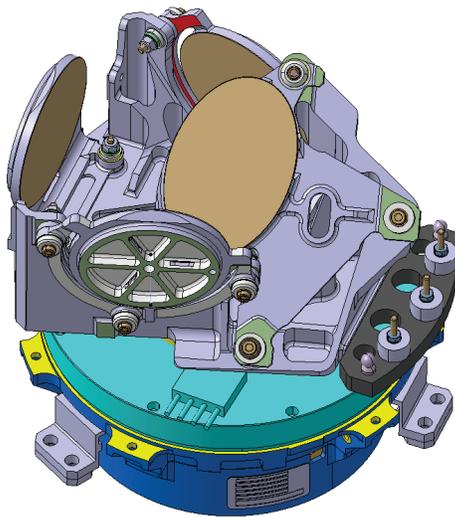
METimage Derotator Assembly (including mechanism, courtesy of Airbus Defence & Space).
